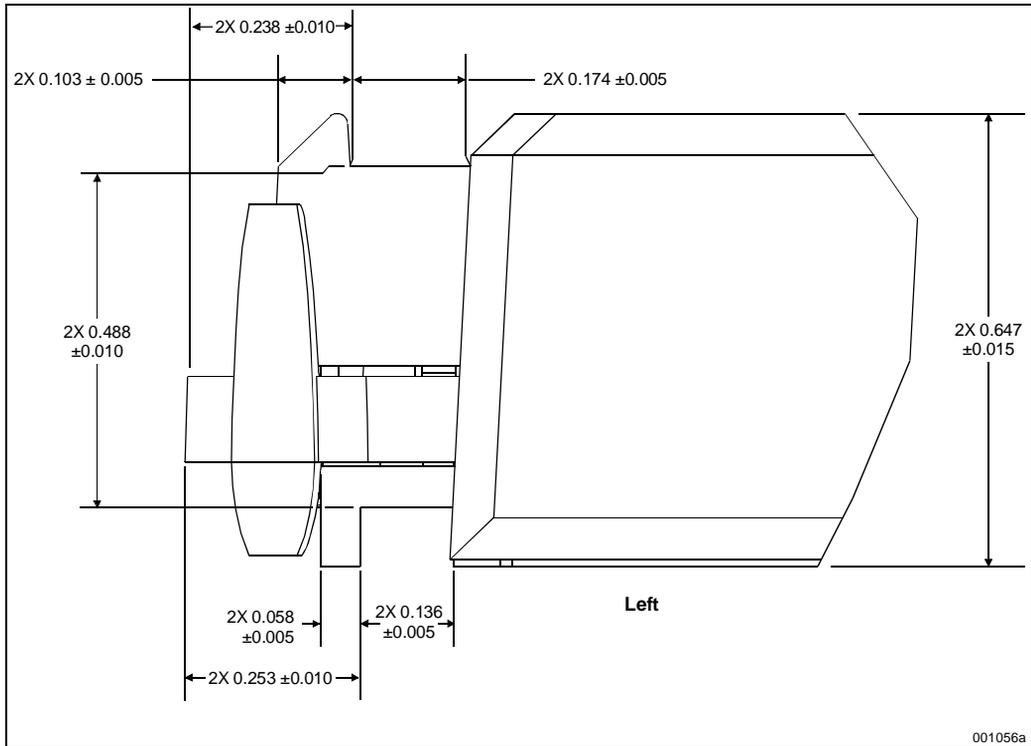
S.E.C. Cartridge Latch Arm, Thermal Plate Lug and Cover Lug Dimensions
